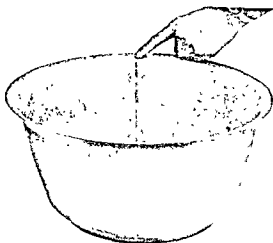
Typical metal shapes produced by explosive forming. Note the weld in the bowl. (National Northern Corp.)
